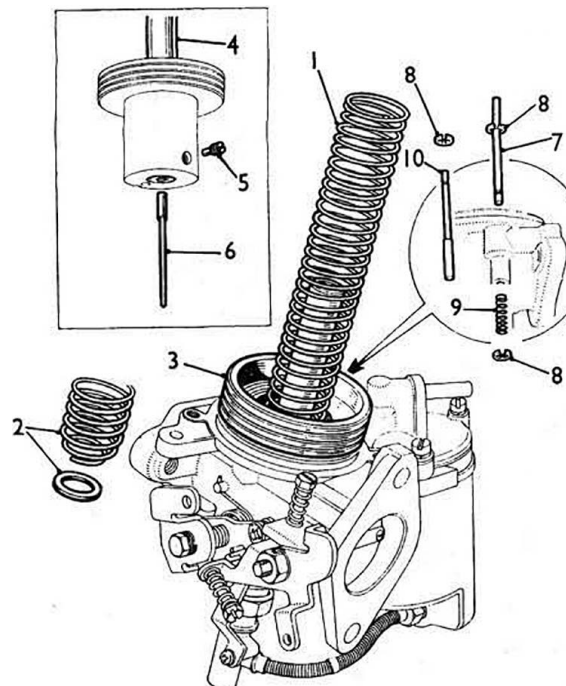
DISMANTLING THE HS6 CARBURETTOR - STAGE 2
